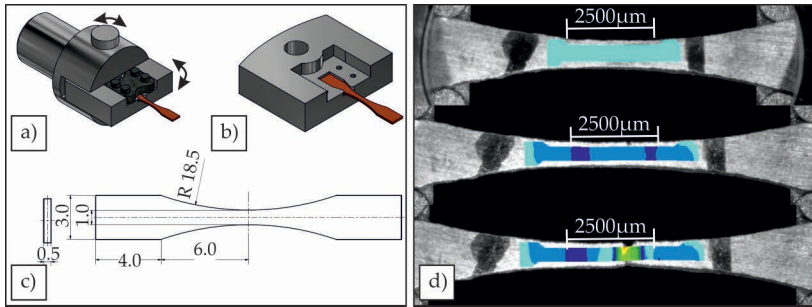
Micro-tensile test set-up with a) gimbal mounting of the micro tensile specimen with a rotatable bearing of the slide. b) Positive locking of specimens into the slide is created by sink erosion of a specimen shaped cavity. c) Dimensions of the hourglass specimen after sintering. d) Digital image correlation was used to measure the effective length according to regions of highest strain. Figures a-c) reprinted with permission [57].
